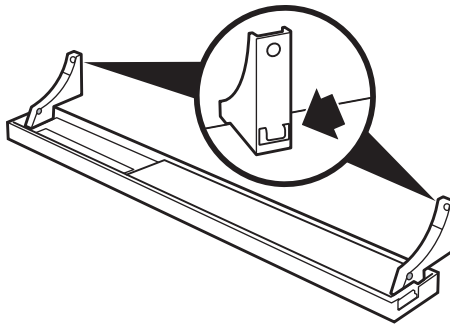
Identifying the Mounting Tabs of the Bezel Hinges
